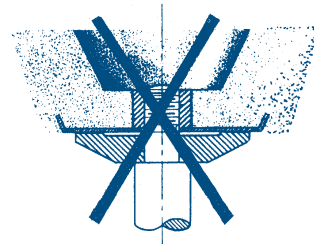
An incorrectly mounted threaded-hole wheel. The recessed flanges do not provide proper support.
